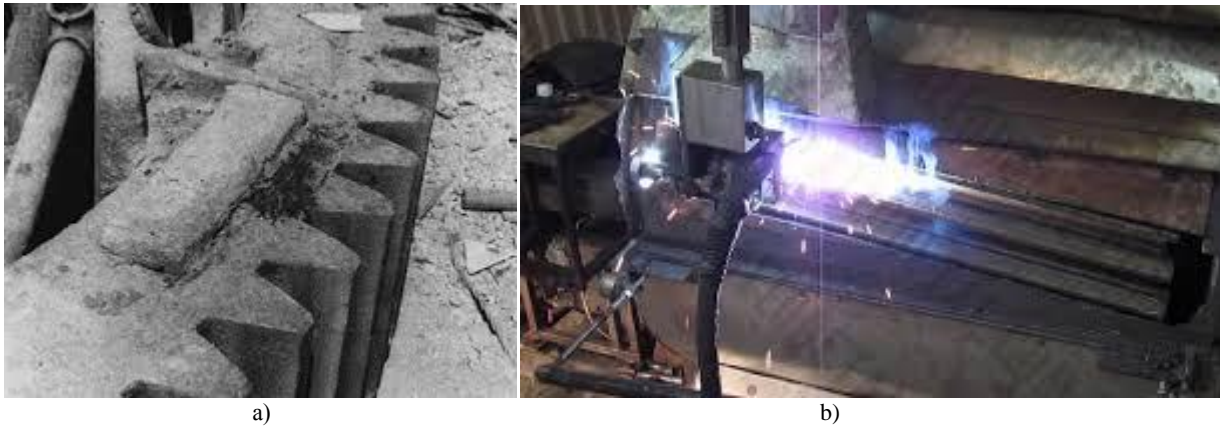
Worn large gear wheels: a) a worn cylindrical gear wheel; b) a worn cylindrical gear wheel surfacing
